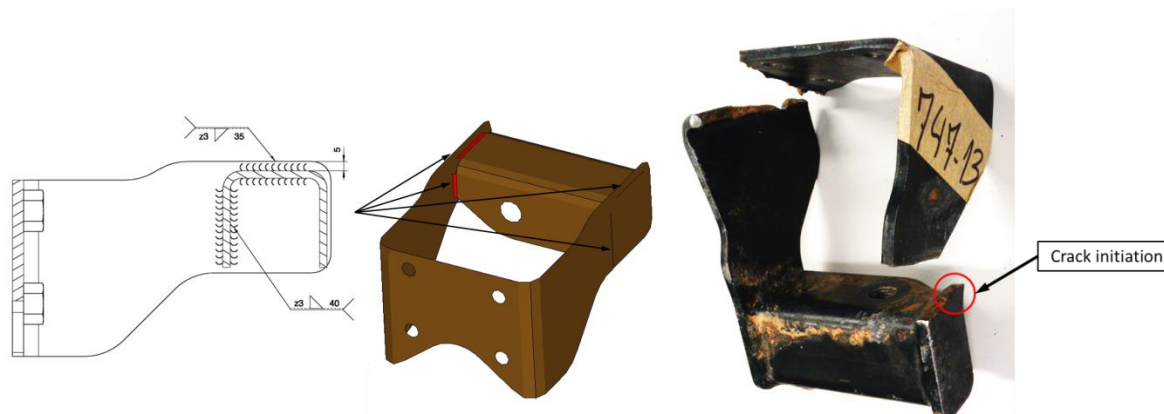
Failure mode detected during Rough Road mission: crack initiated at seam weld bead
